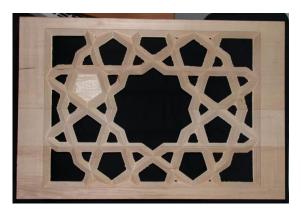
A sample star pattern cut with a traditional 3-axis NC milling machine using the technique discussed in Section 2.1.
